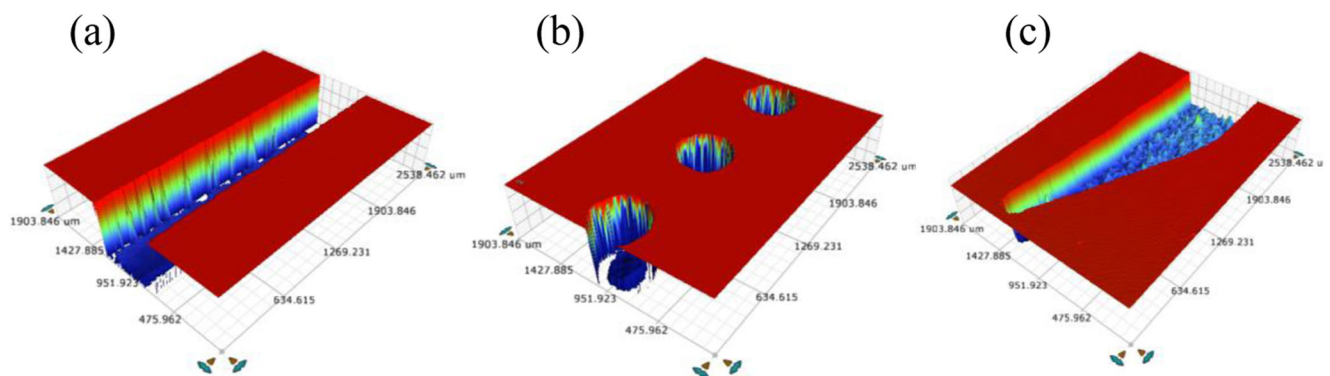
Partial 3D profile of the three typical surface textures machined using MJM. a Channel. b Dimples. c Spiral groove
